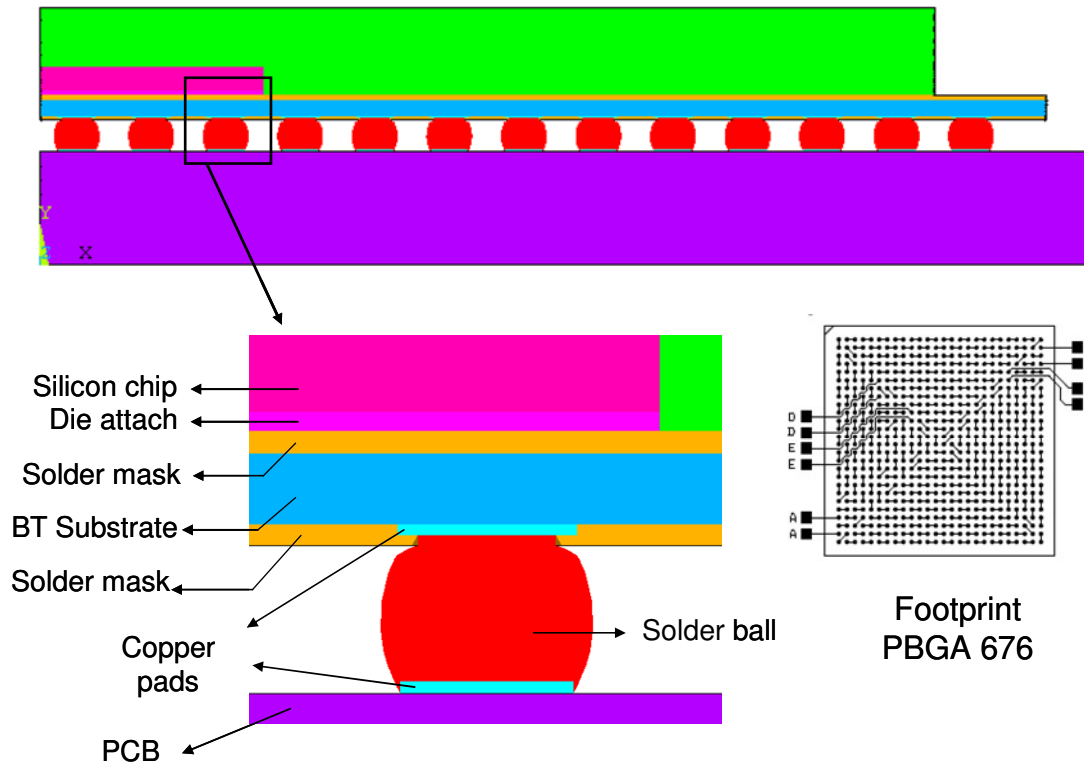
Cross-section along the centerline and footprint of the PBGA 676 package
